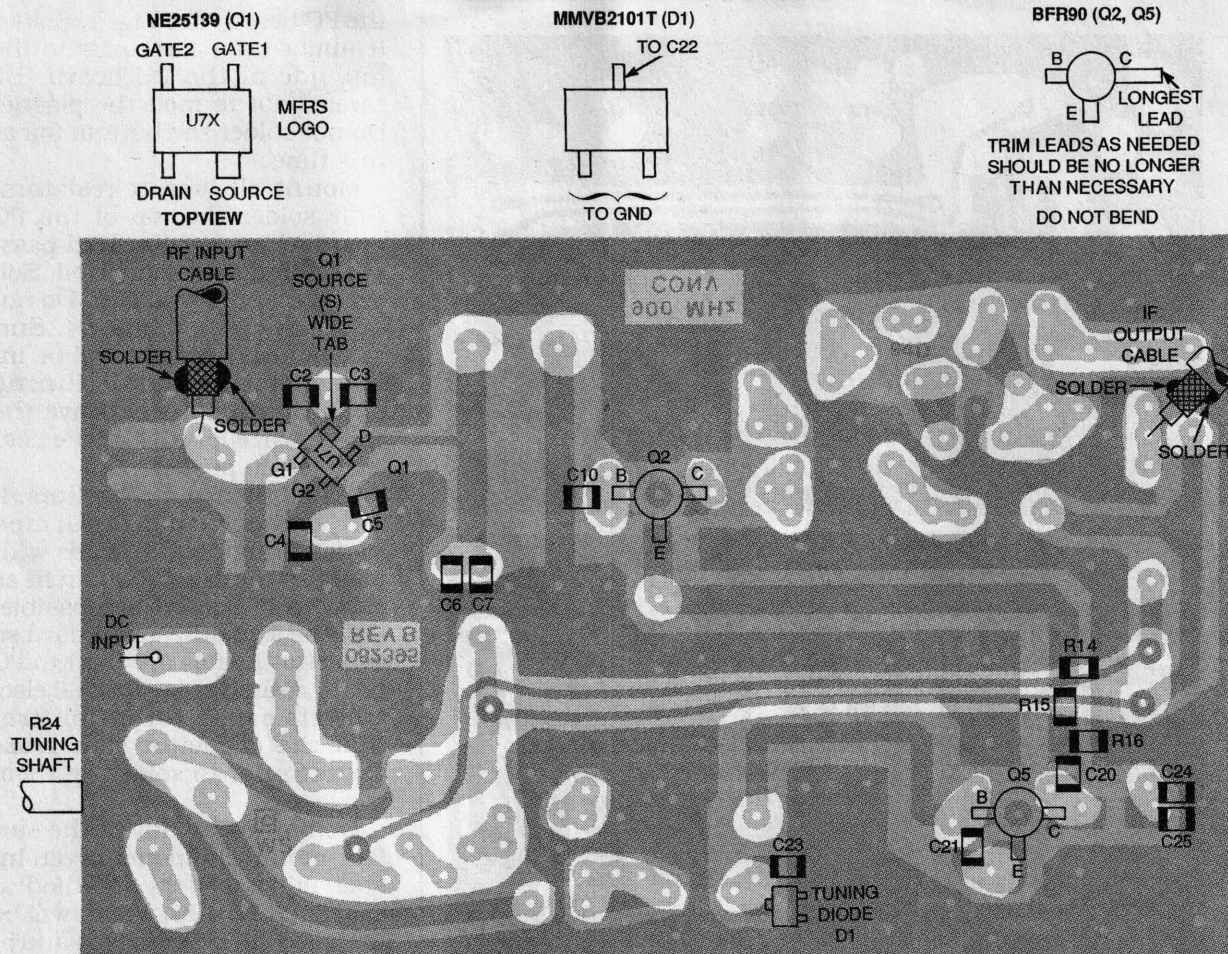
BOTTOM SIDE OF PC BOARD for the 900-MHz downconverter is shown with parts locations identified. Cable lengths should be just long enough to provide suitable length when PC board is installed in a metal case.
